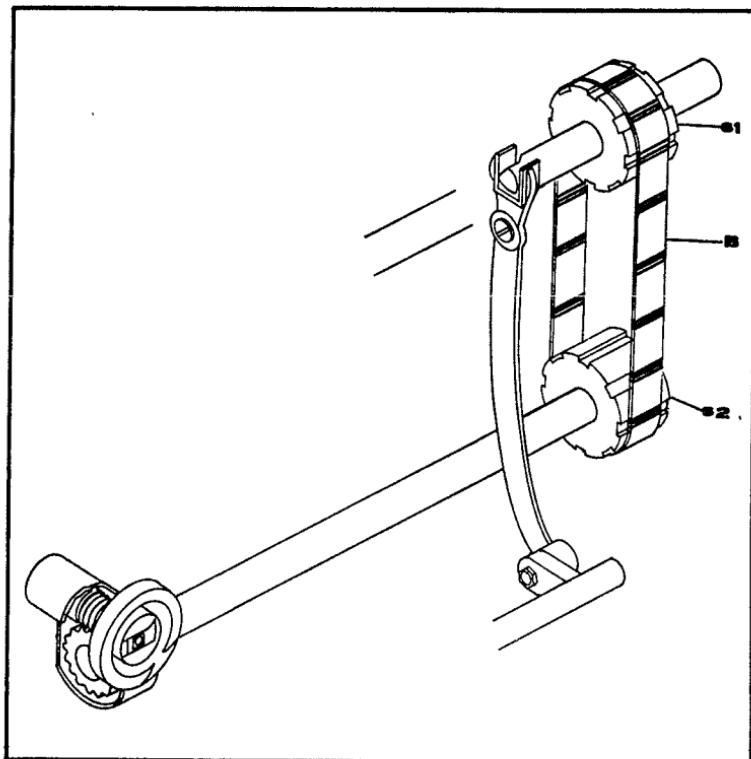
This drawing shows how full rotation of the shuttle is accomplished. In some machines, full rotation of the shuttle is accomplished through gears, or the timing belt may be found located horizontally under the bed of the machine.
